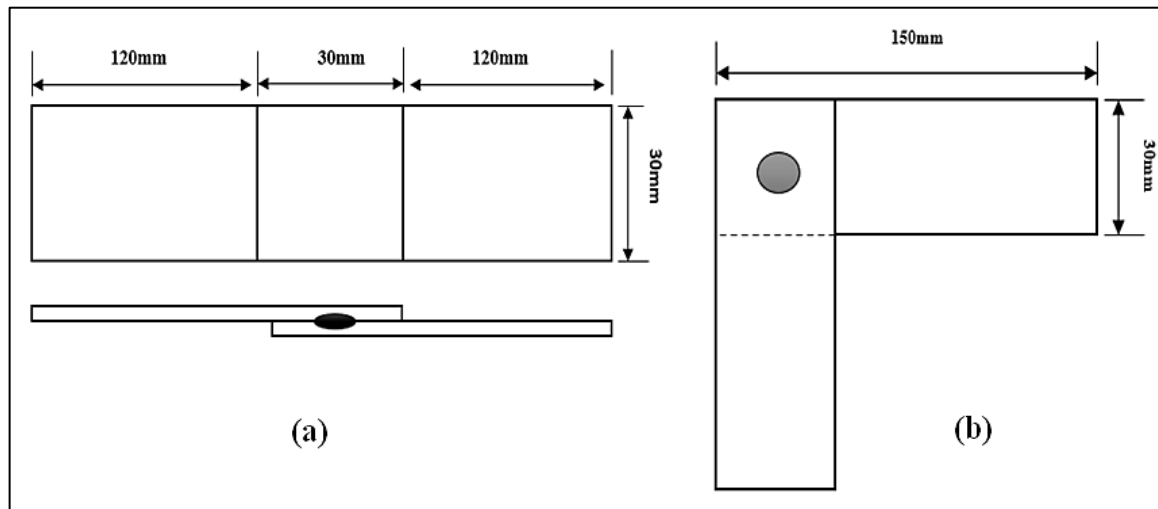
Specimens arrangement for welding in (a) tensile test, (b) torsion test
